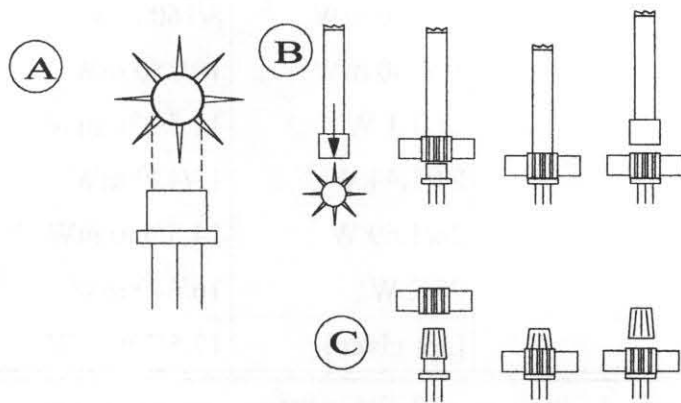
Using a nut driver or wire nut to install a finned heat sink on a transistor.
